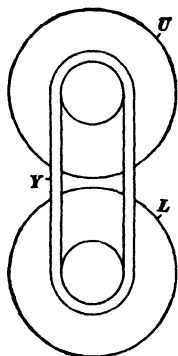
L, lower roll; U, upper roll; Y, yoke, or link.
